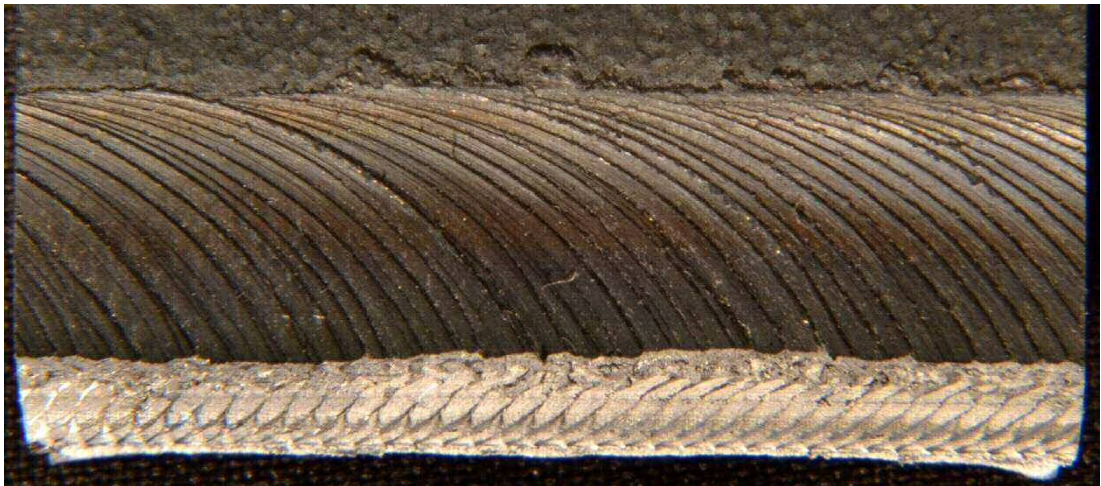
Fast weld sample tested at 80% of YS (129,490 cycles to fracture)
